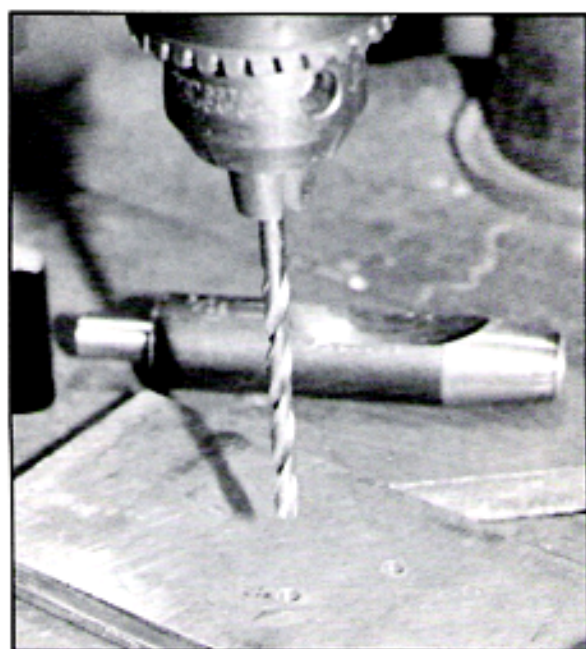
DRILL CENTER PIN HOLE INTO BRASS PLATE CLAMPED TO DRILL PRESS BED.
